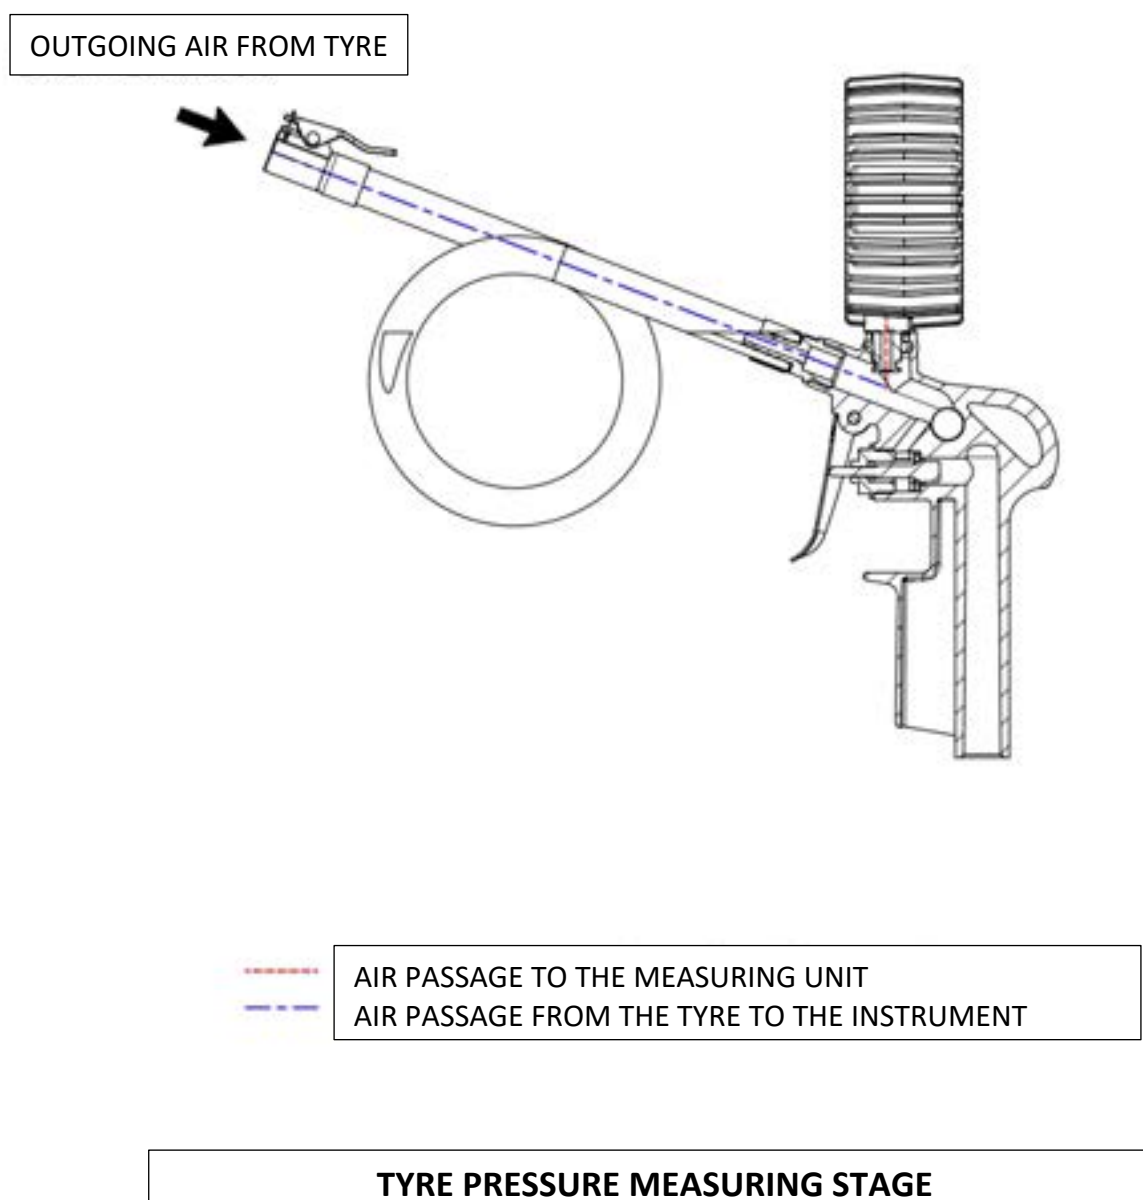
TYRE PRESSURE GAUGE “60 D/T” (vers. 63 mm)
